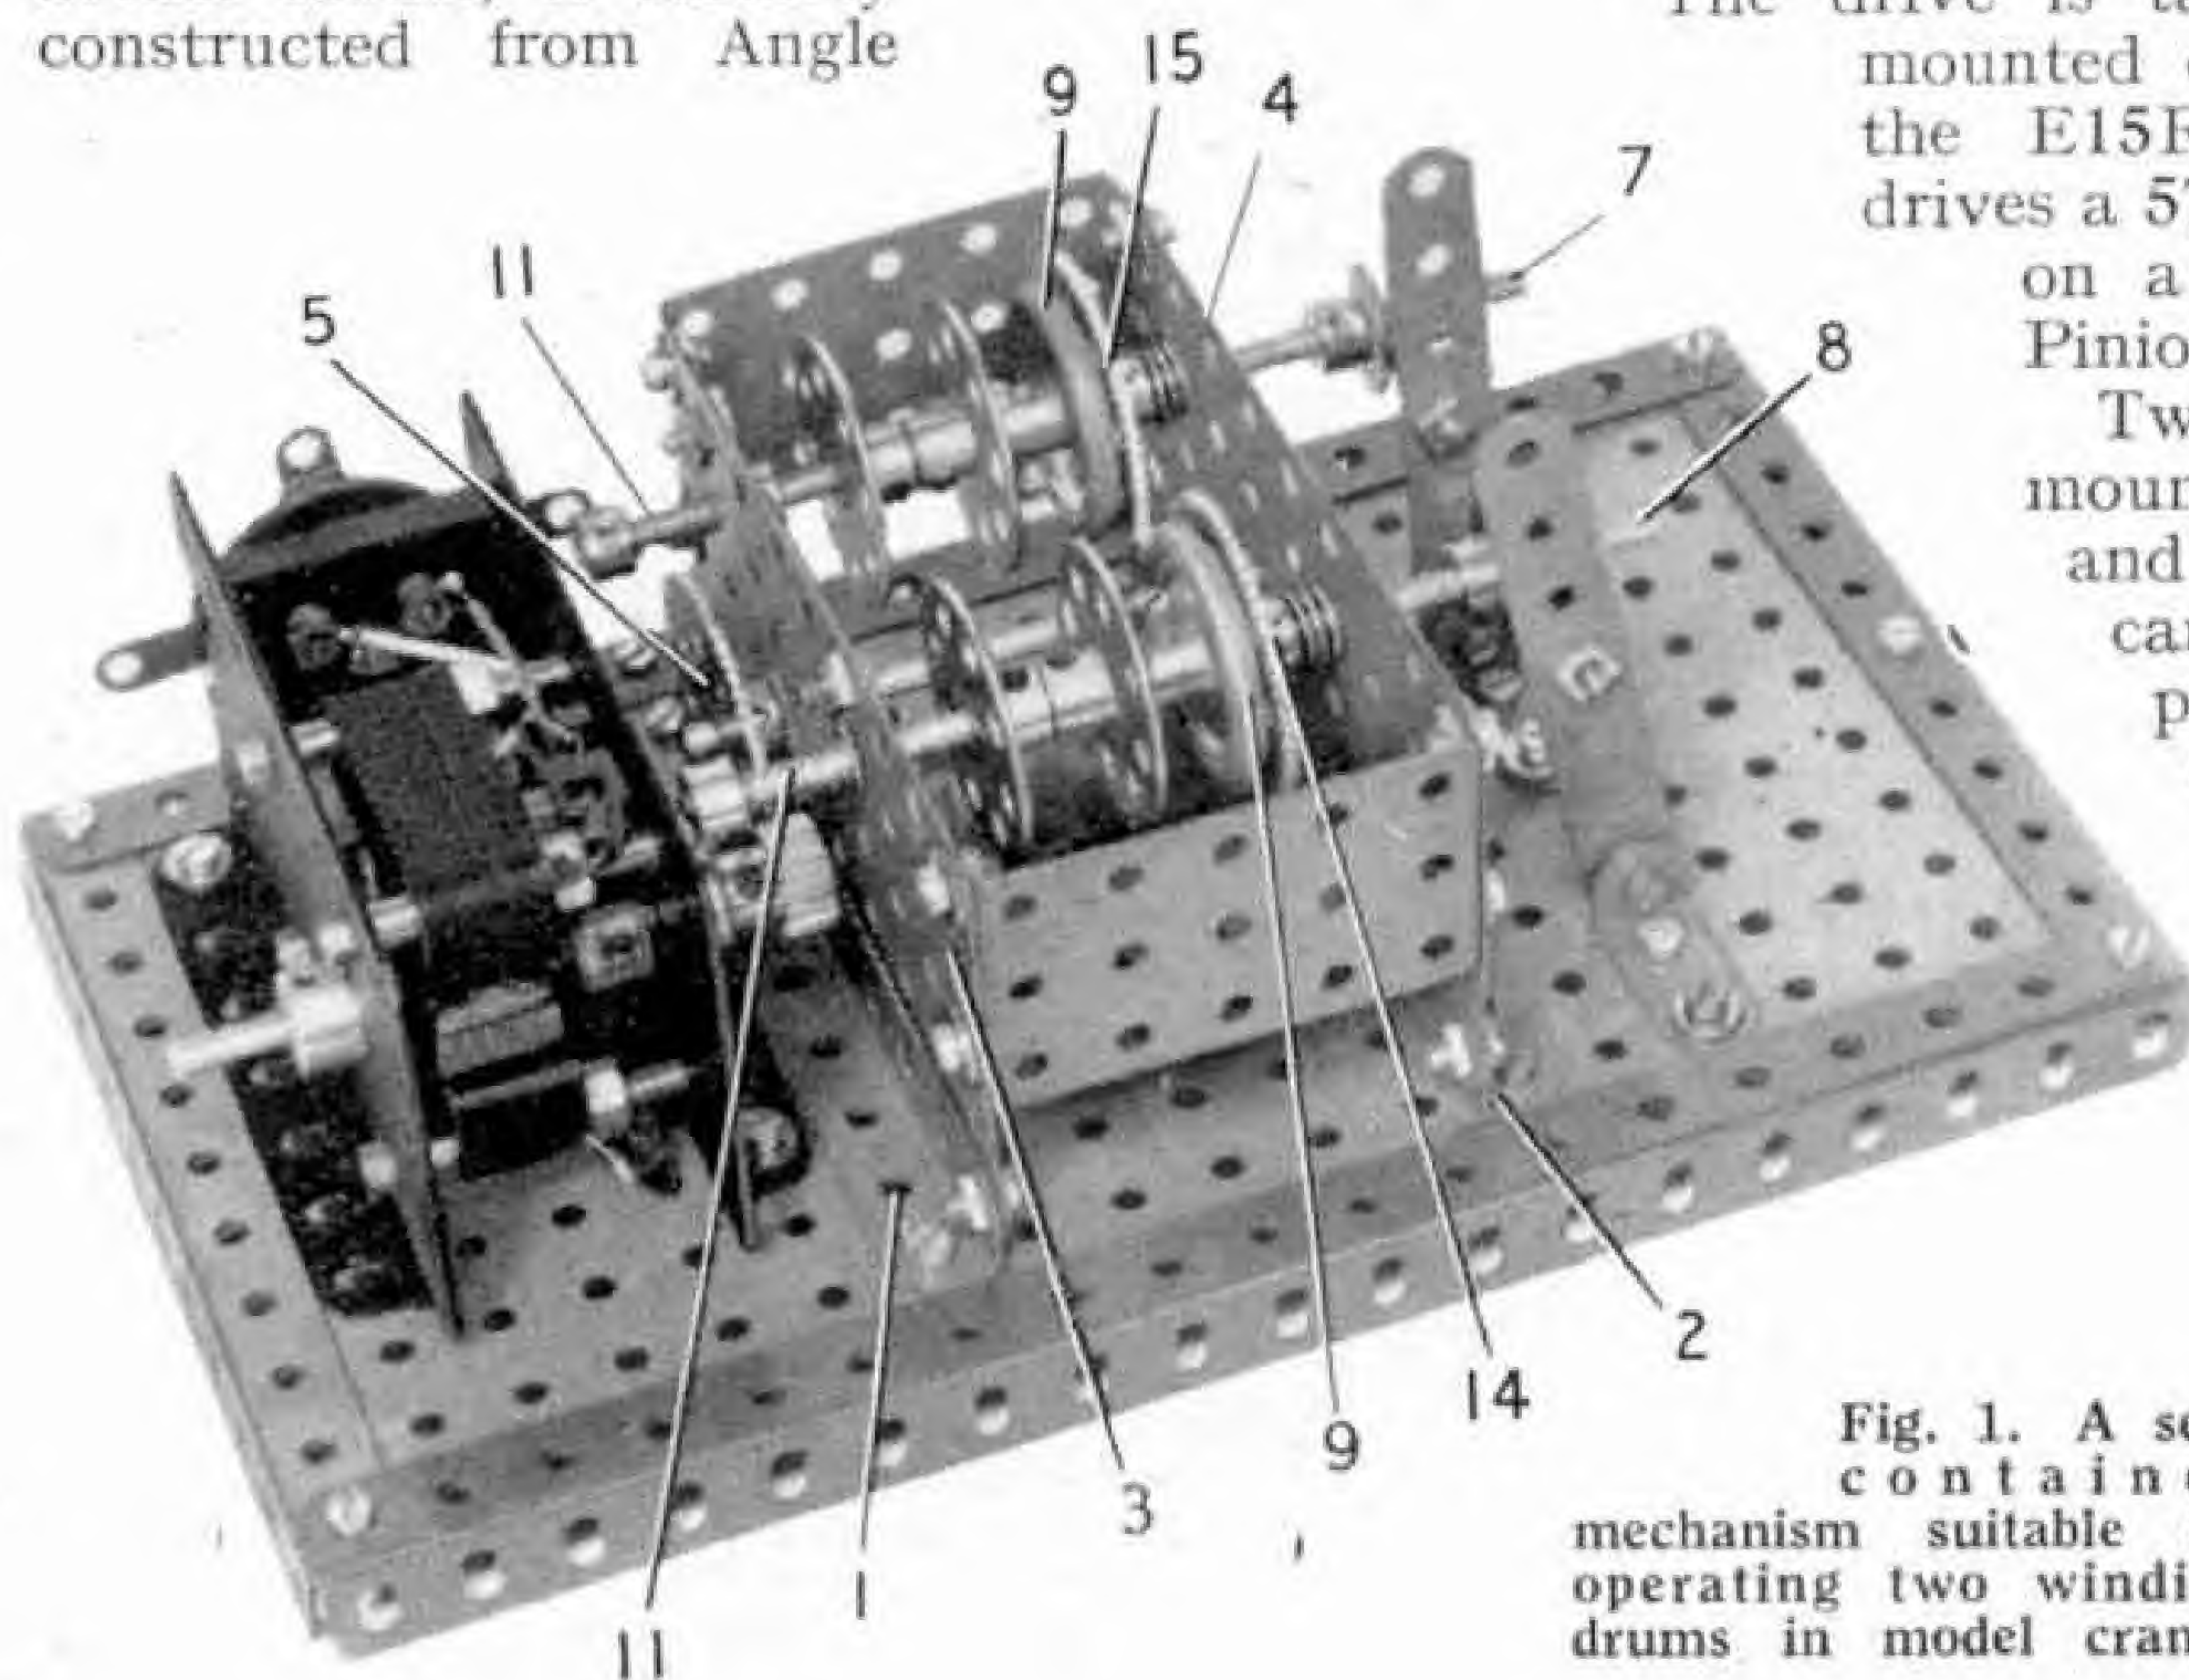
A self-contained mechanism suitable for operating two winding drums in model cranes.
